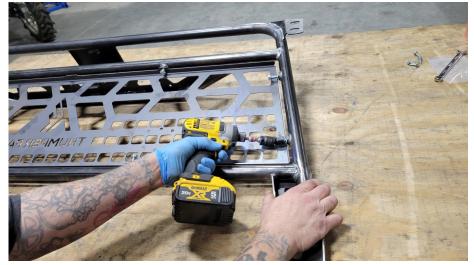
Fasten Accent Panel To Headache Rack Using 13 mm Socket
